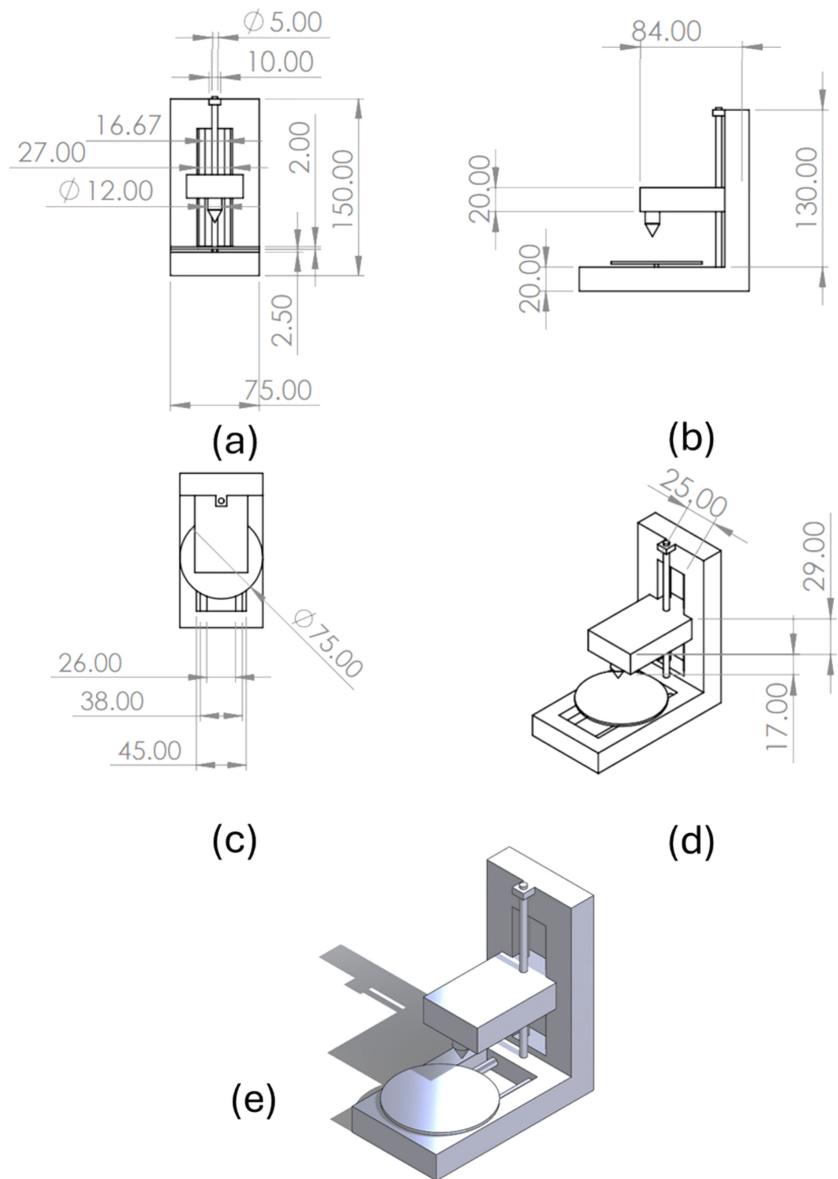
a Front view, b Right side view, c Top view, d Isometric view, e CAD model of polar 3D printer
